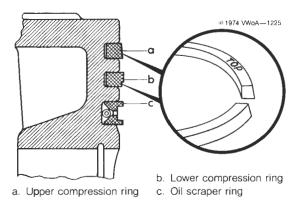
Proper ring installation. The word TOP must be toward the piston crown.
